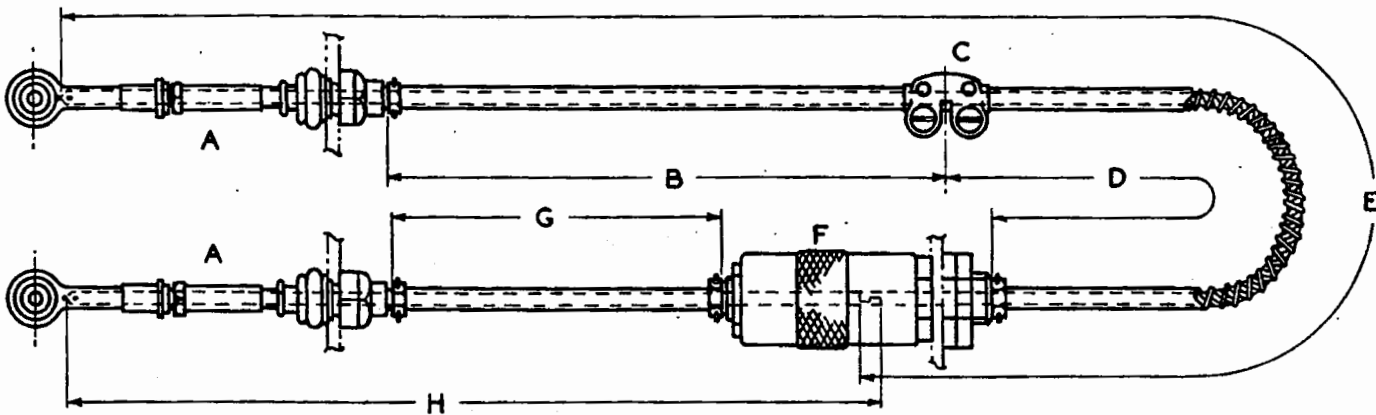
(Sheet 3 of 3 Sheets.) Flexible Cable Assemblies Reference Diagram.
